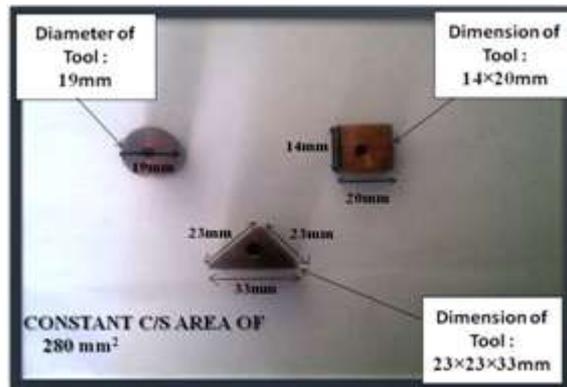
Raw material pure copper (electrode shapes) as per required dimensions
